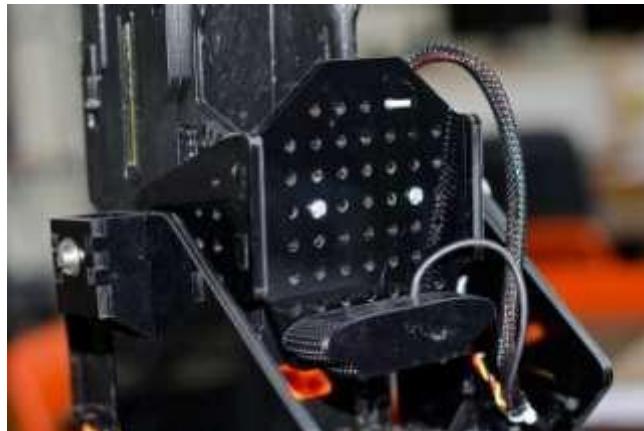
Tilt platform provides generic mounting holes for mounting other objects.
